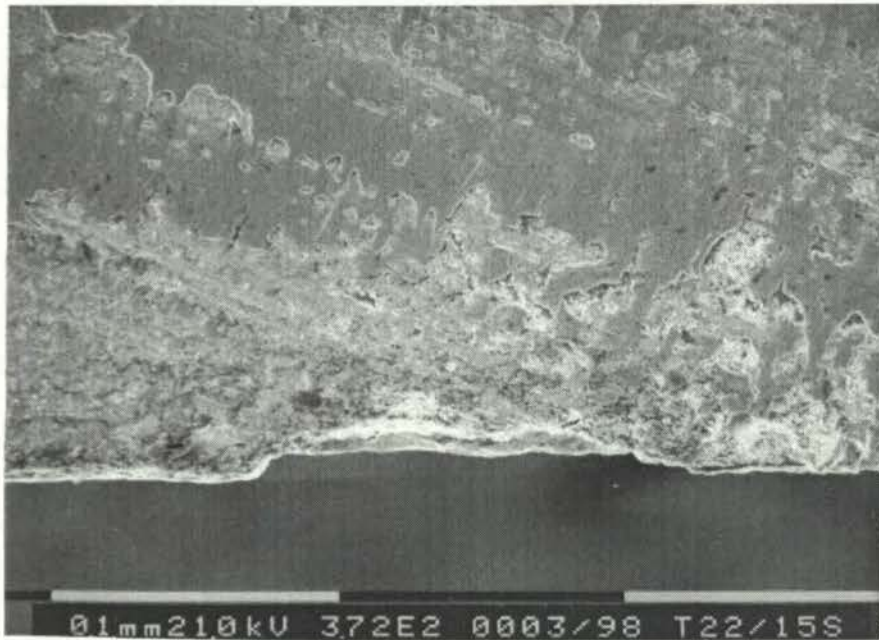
115 Magnified view of the KC720 tool in Figure 7.113 showing coating delamination, substrate pitting and galling on the rake face with adhered bulks of workpiece at the cutting edge
